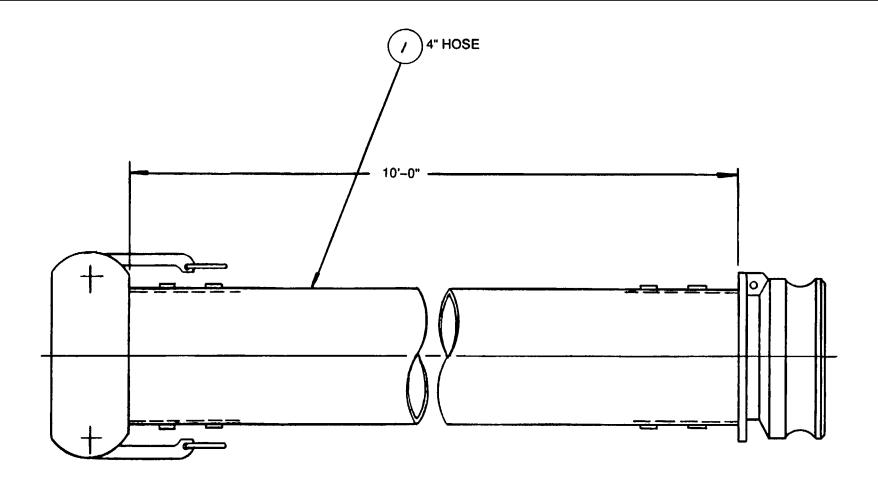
A HOSE ASSEMBLY (MODEL 91094)
